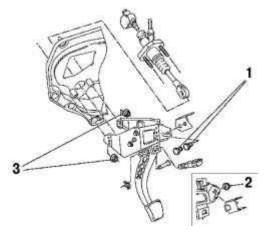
Removing Oprah pedal: 1 - bolts, 2 - nut, 3 - nuts pedal
